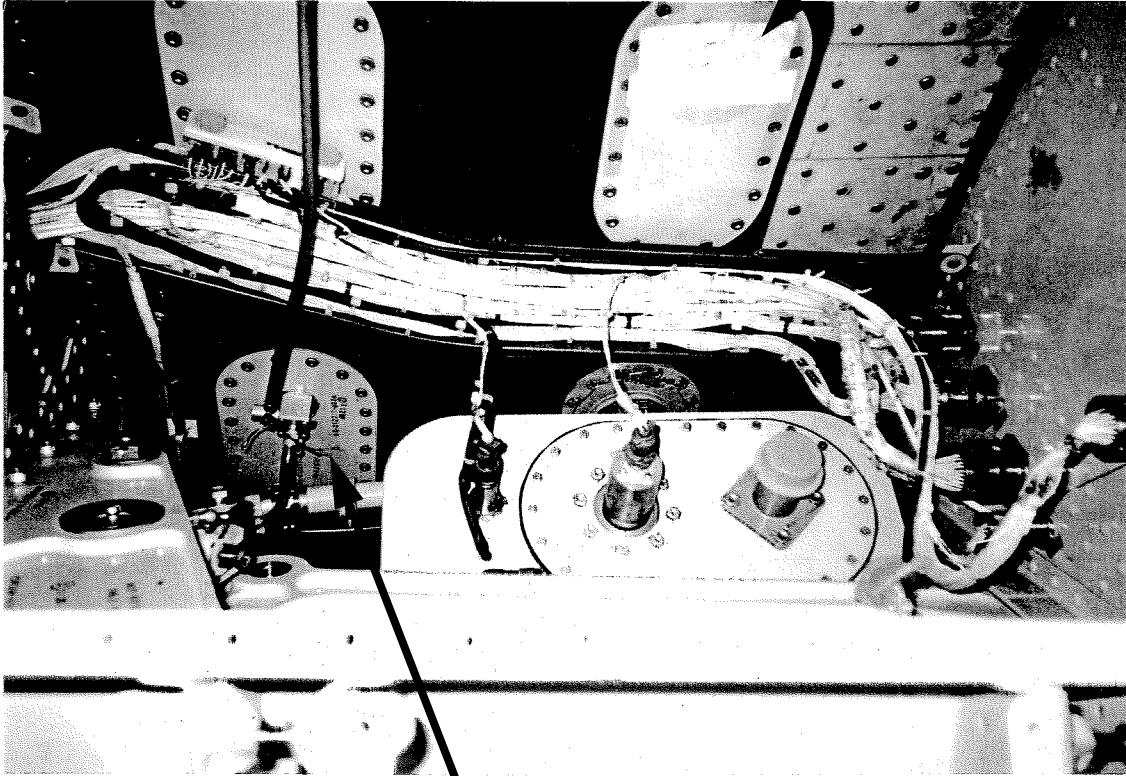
RH Collector Tank / Wing Flexible Connect - Removal/Installat. (Sheet 2 of 3)
